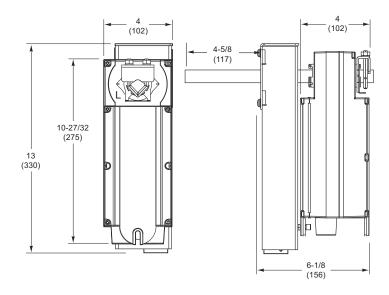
Mx41-6343-230 Actuator/Linkage Assembly With AV-609-1 Linkage.
